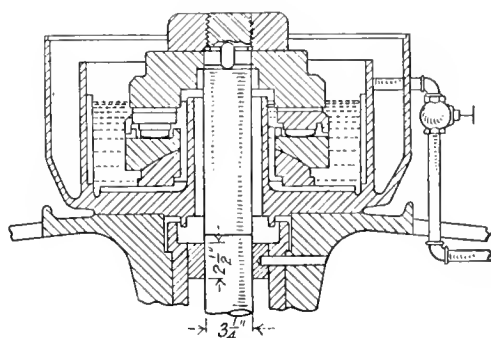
SECTION THROUGH THRUST BEARING EMPLOYED IN THE TESTS
